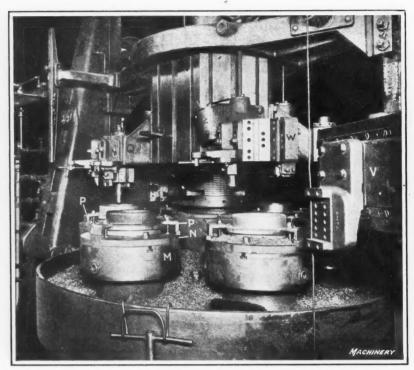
Front View of Ryerson-Conradson Vertical Automatic Lathe equipped for performing Second Sequence of Machining Operations on Nash Flywheels
